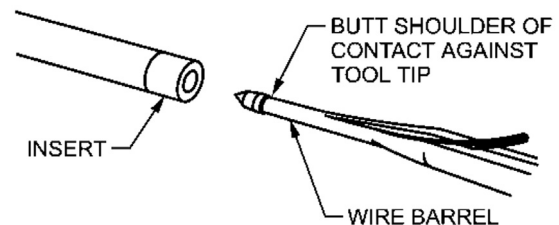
Contact Insertion in Removable Contact Wire Splices
